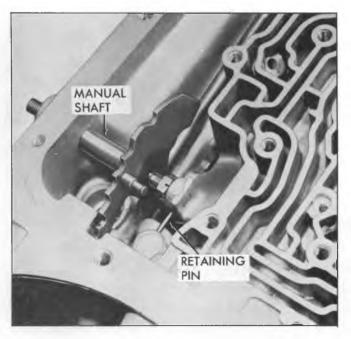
T--Removing Manual Shaft Retaining Pin from Case
